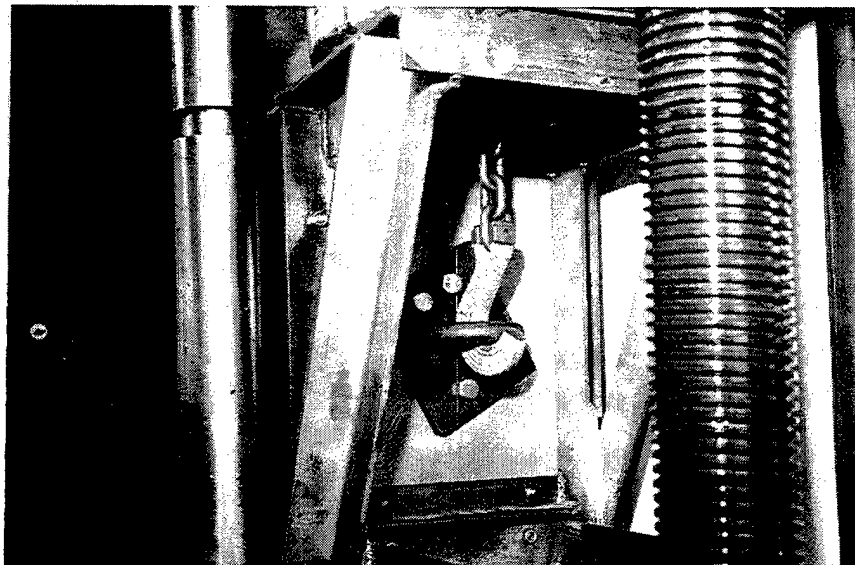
A view of the test jig with the U-shaped bar of the new lifting device in the horizontal position for the perpendicular pull test. This test will apply the load in tension to the apex of the bar that will bend upward.
